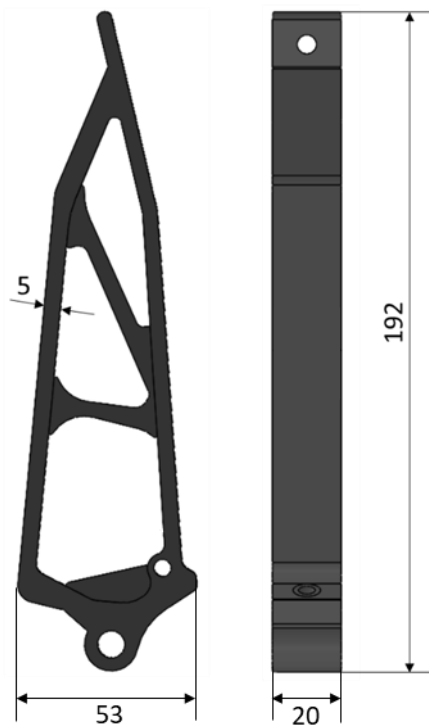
Pedal lever geometry. Dimensions are expressed in millimeters.
